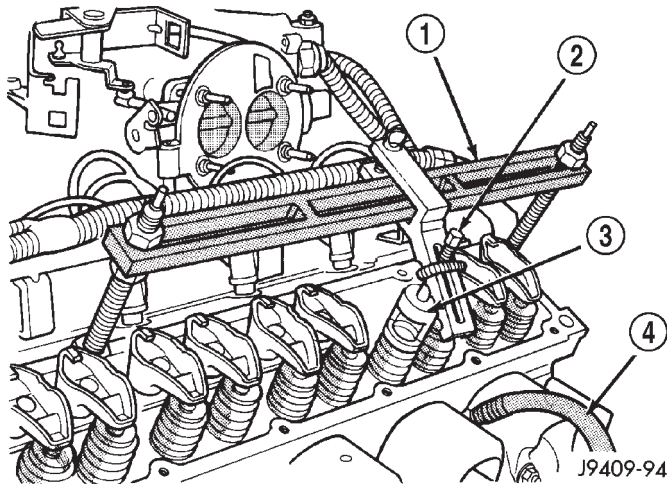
Valve Spring Compressor MD-998772A with Adaptor 6716-A and Screw 6765
